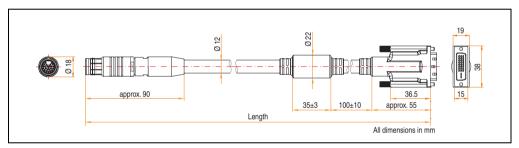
Dimensions - SDL cable 5CASDL.0xxx-20 Rev. < A5
